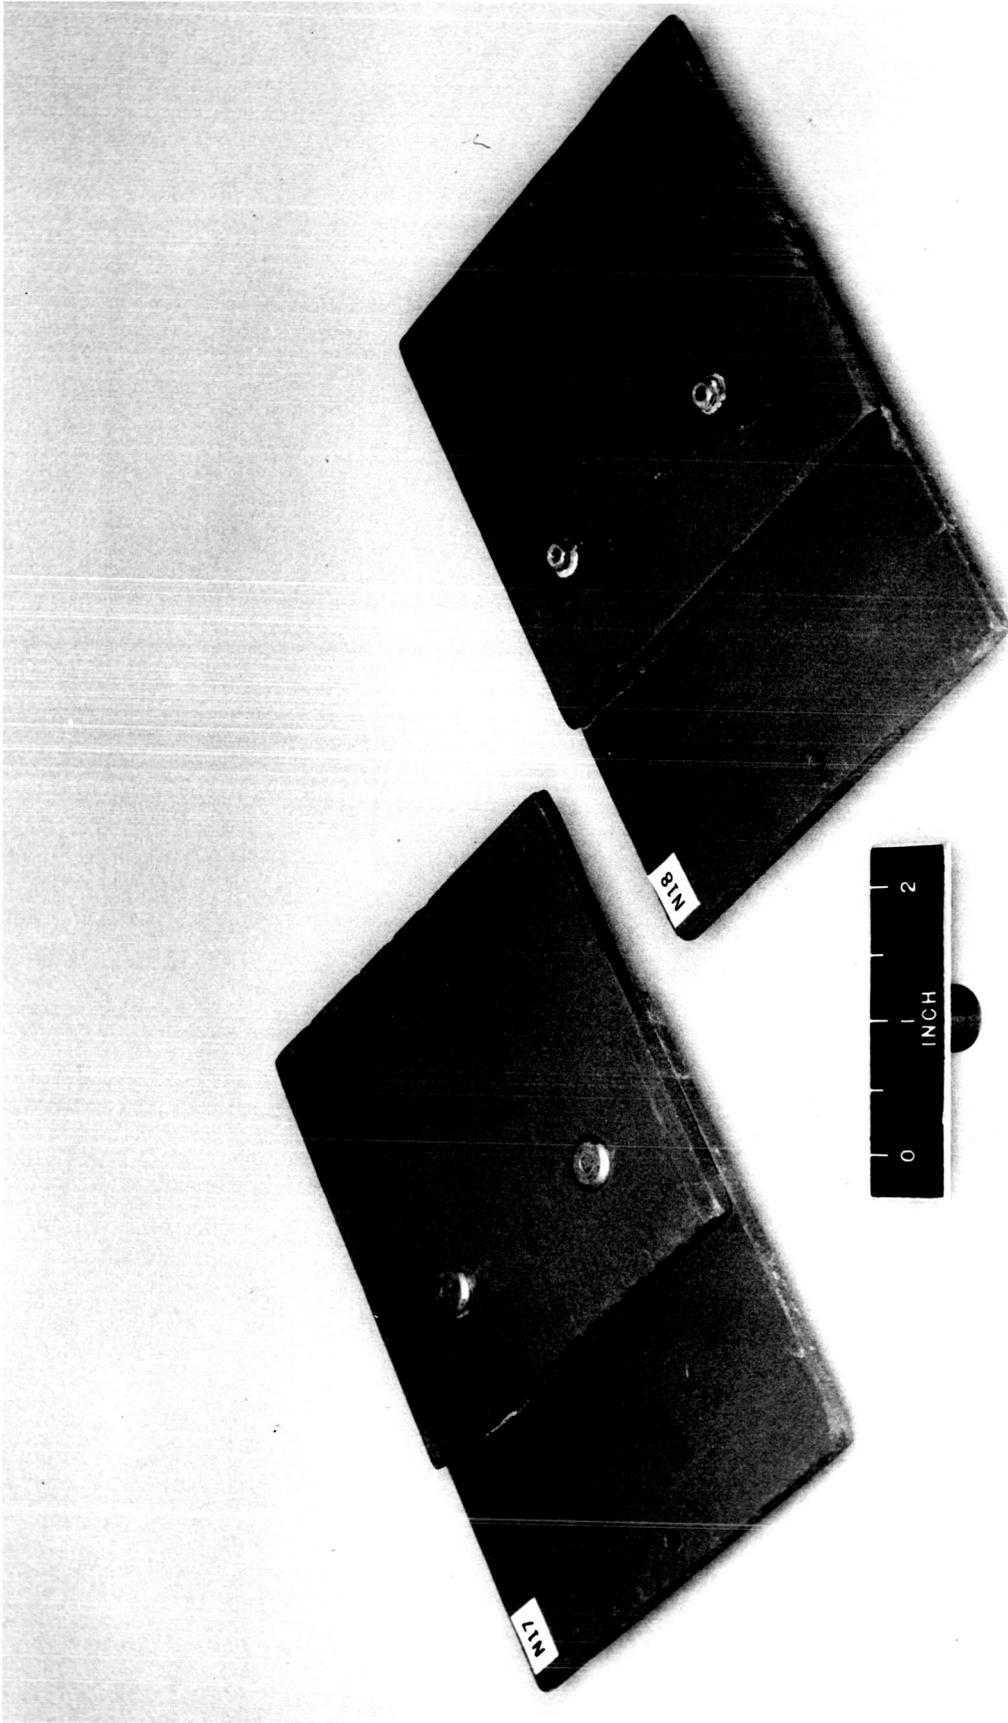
CORROSION ON CADMIUM PLATED FASTENERS CONNECTING PAINTED 7075 ALUMINUM PANELS AFTER 200 HOURS SALT SPRAY EXPOSURE
